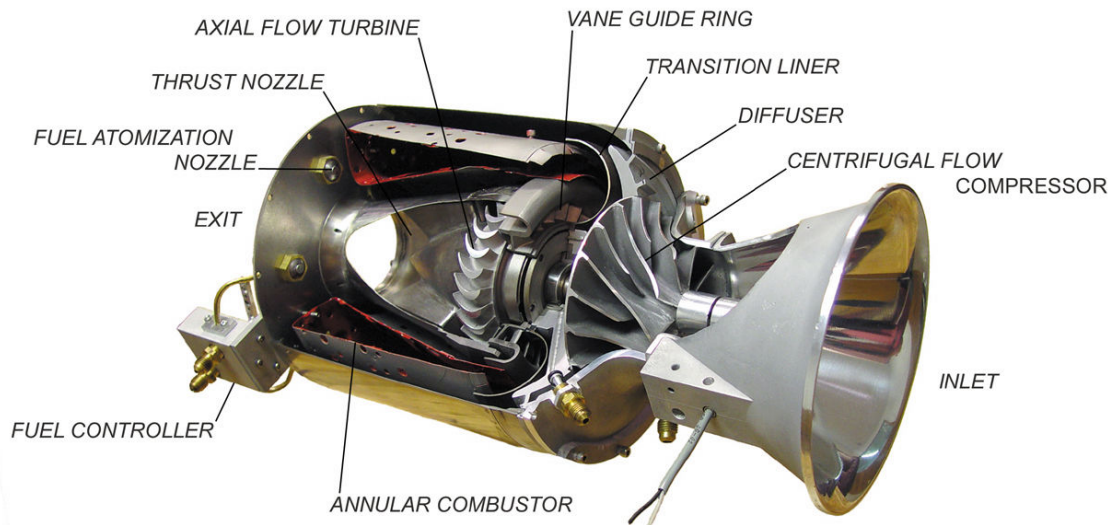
Cut-Away View of Turbine Technologies SR-30 Gas Turbine Engine¹
